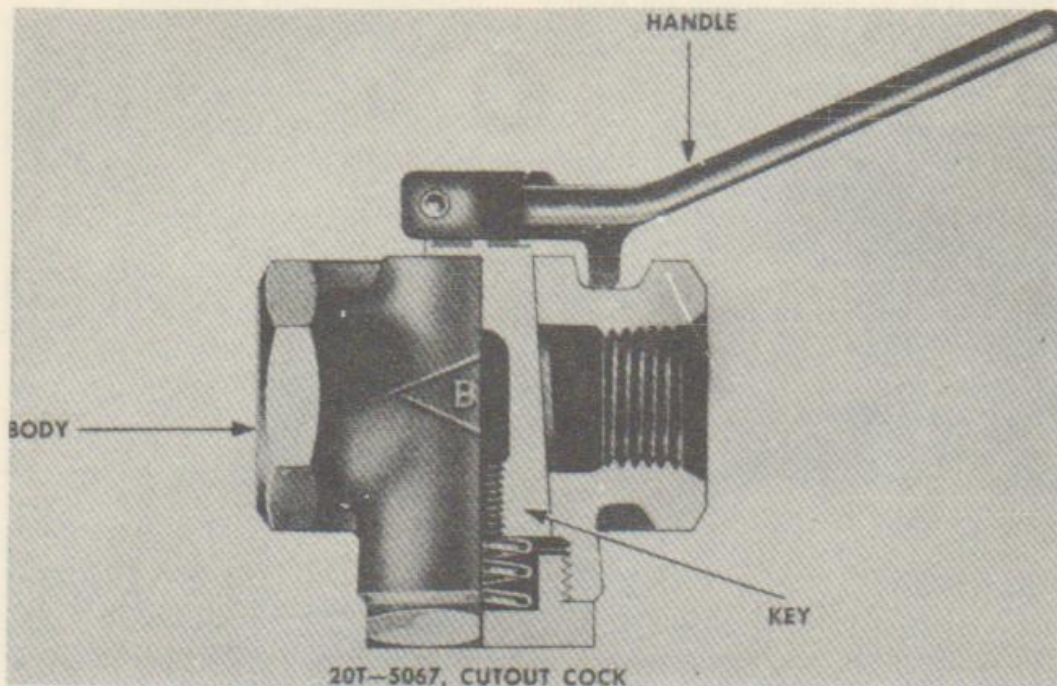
CUT-OUT COCK —EXPLODED VIEW
